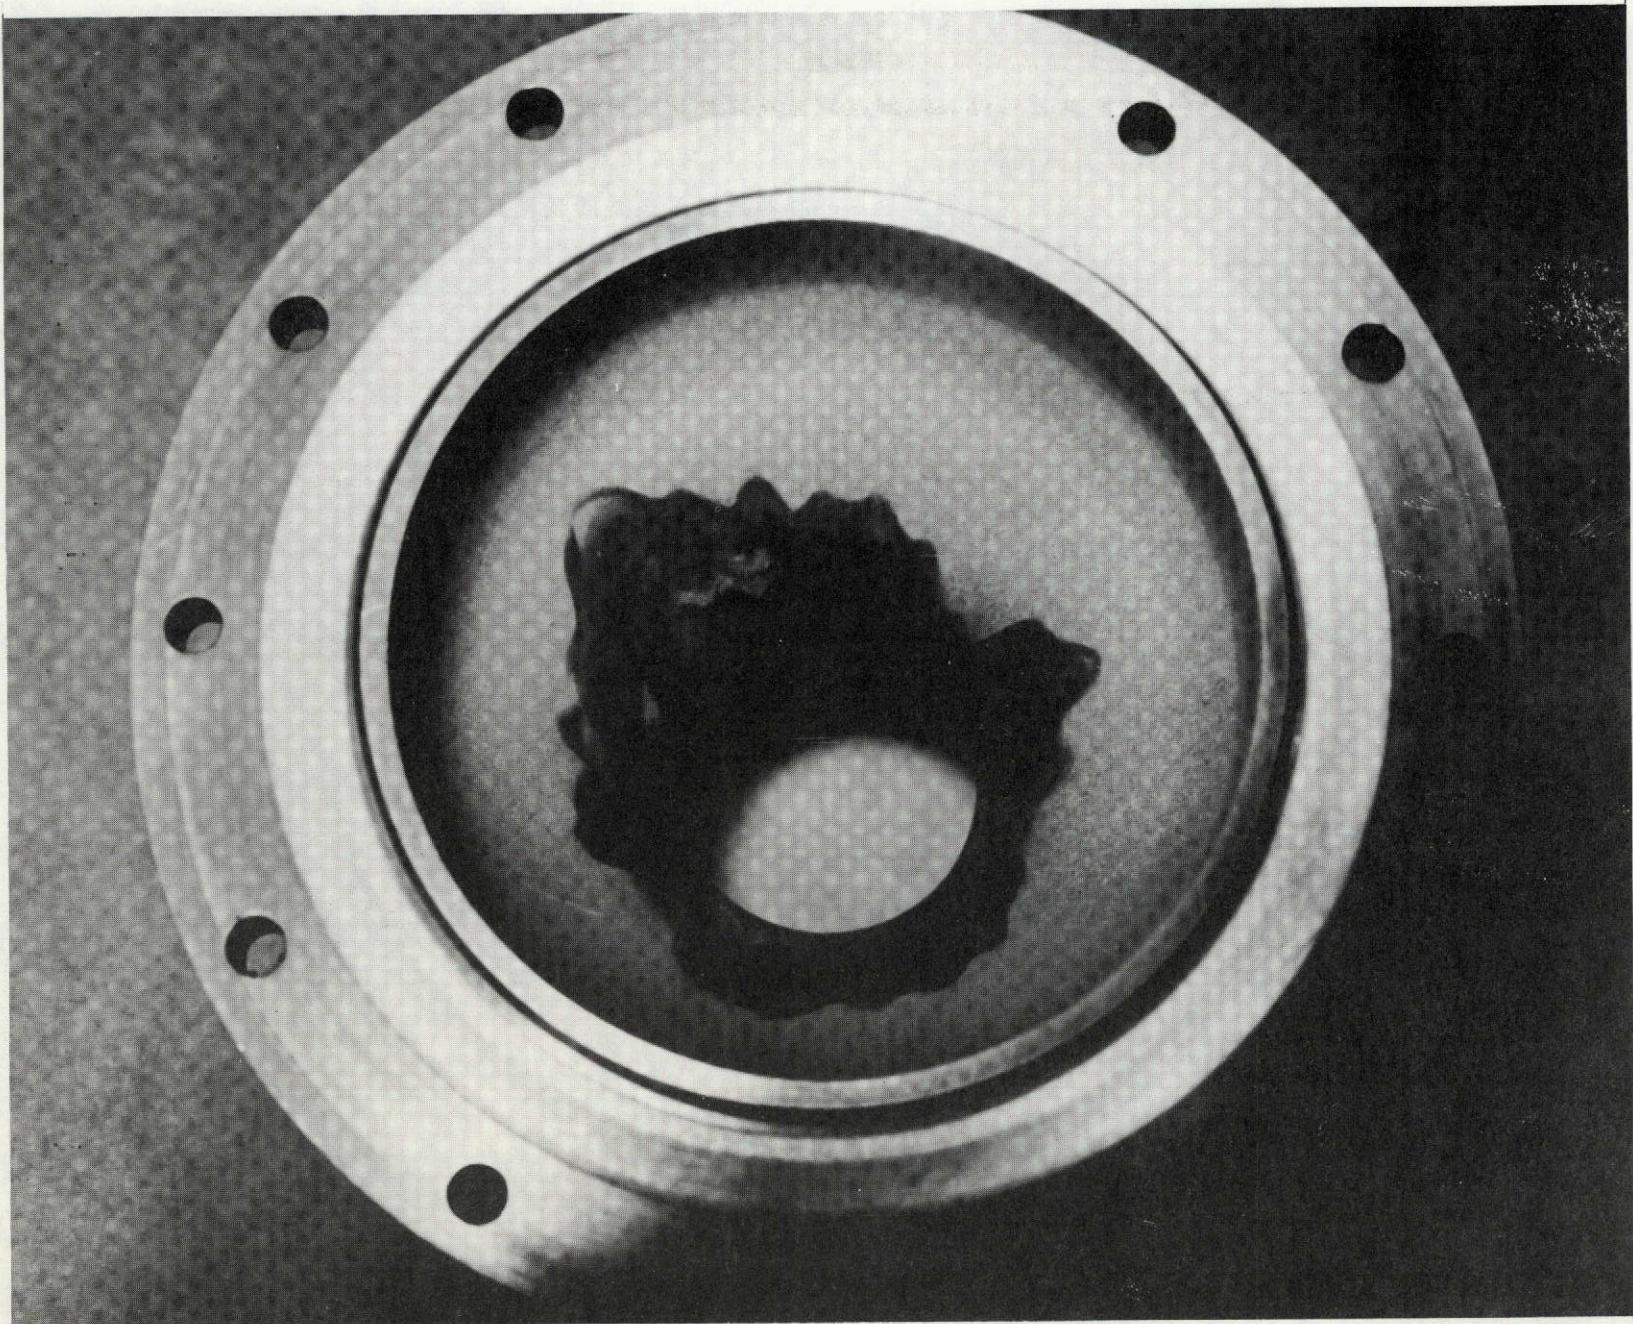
THRUST CHAMBER (VIEW FROM CHAMBER END)
